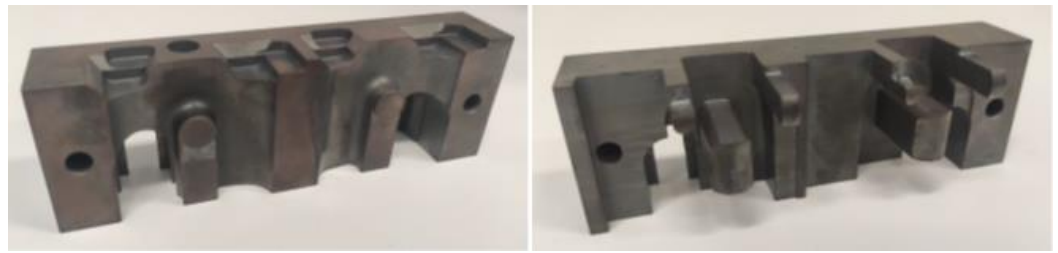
Manufactured the first version of the fixture for clamping workpiece
